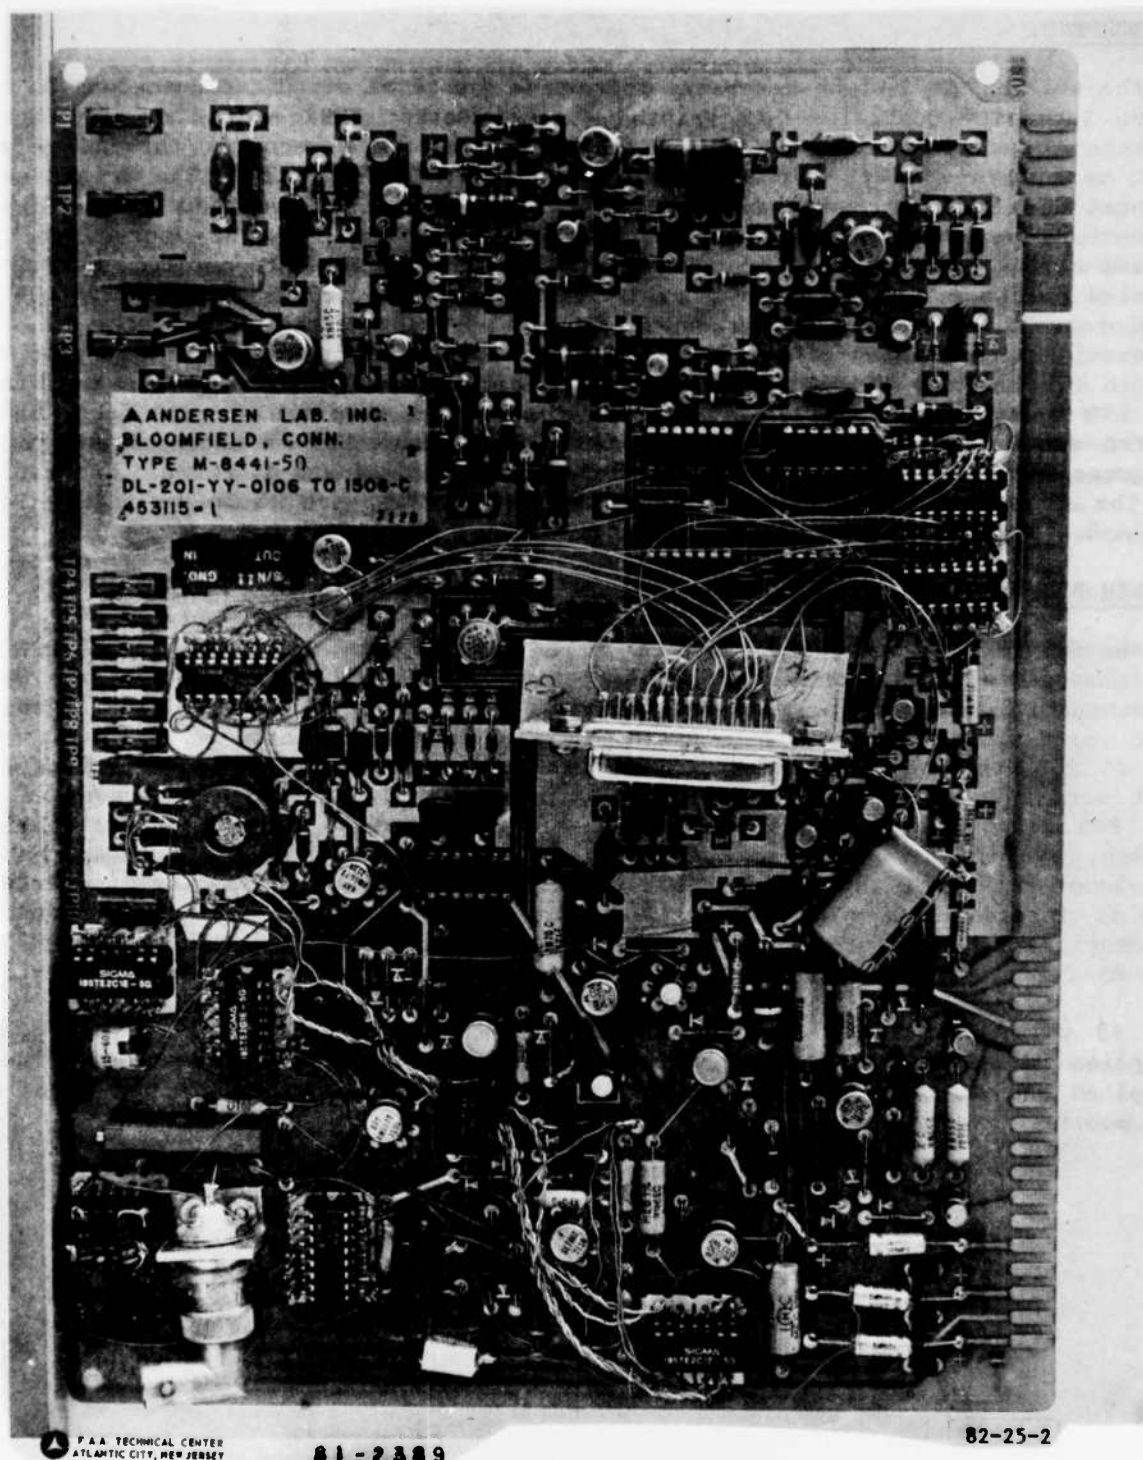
MODIFIED A2 PCB — SWITCH PVD
